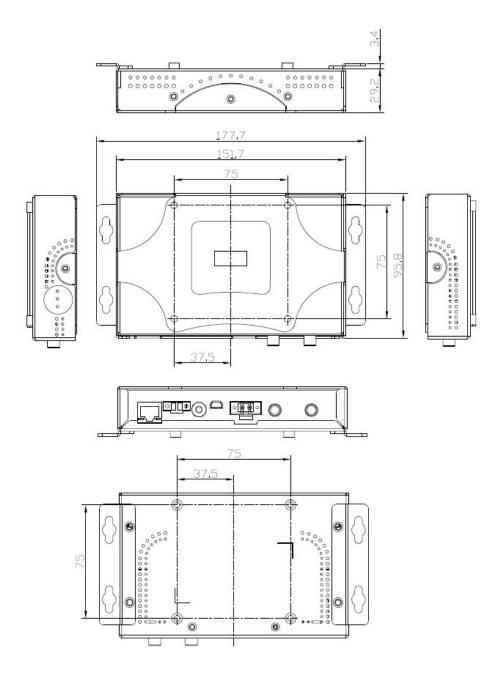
AUPS-A10/A20 Dimensions (mm)
